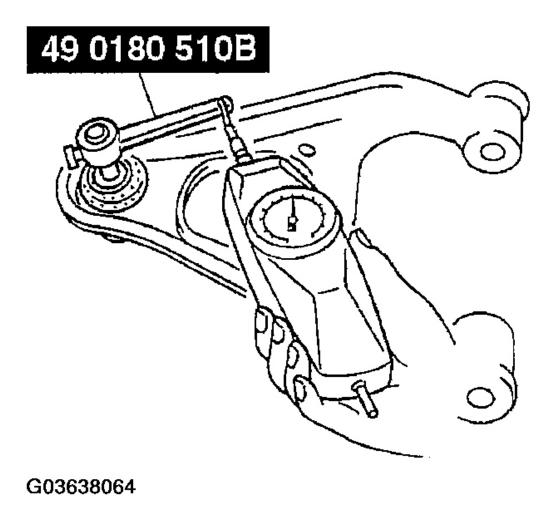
Shaking Ball Joint Stud Courtesy of MAZDA MOTORS CORP.
